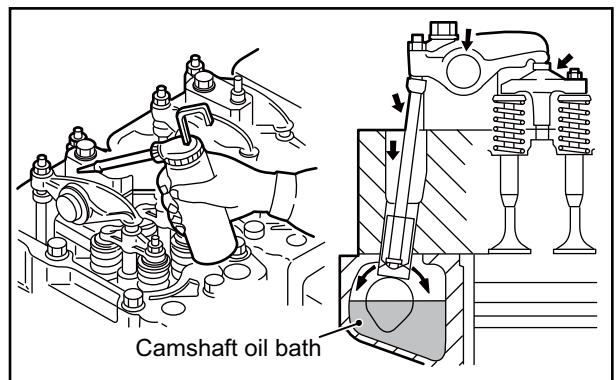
Pouring Engine Oil on Valve Mechanisms and Chamber
